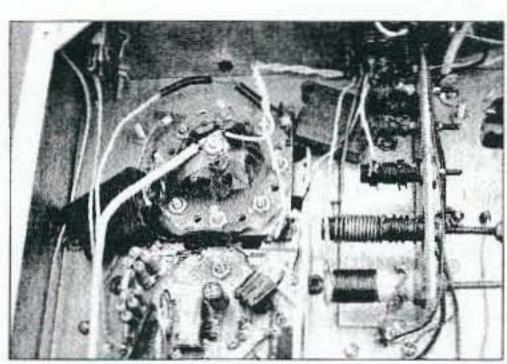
Photo C. This is a closer look at the surroundings of V1. The homemade tube socket is a story in itself. Alternating layers of 0.010-inch sheet brass and unclad glass-epoxy board are used to make the supporting structure and contacts. The ventilated brass sheets and a small finned heat sink help cool the tube base.
